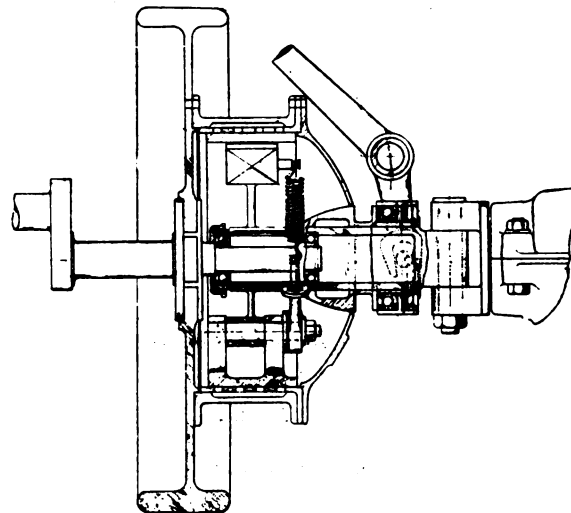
Sectional View of new Germain Metal-to-Metal Expanding Clutch.
